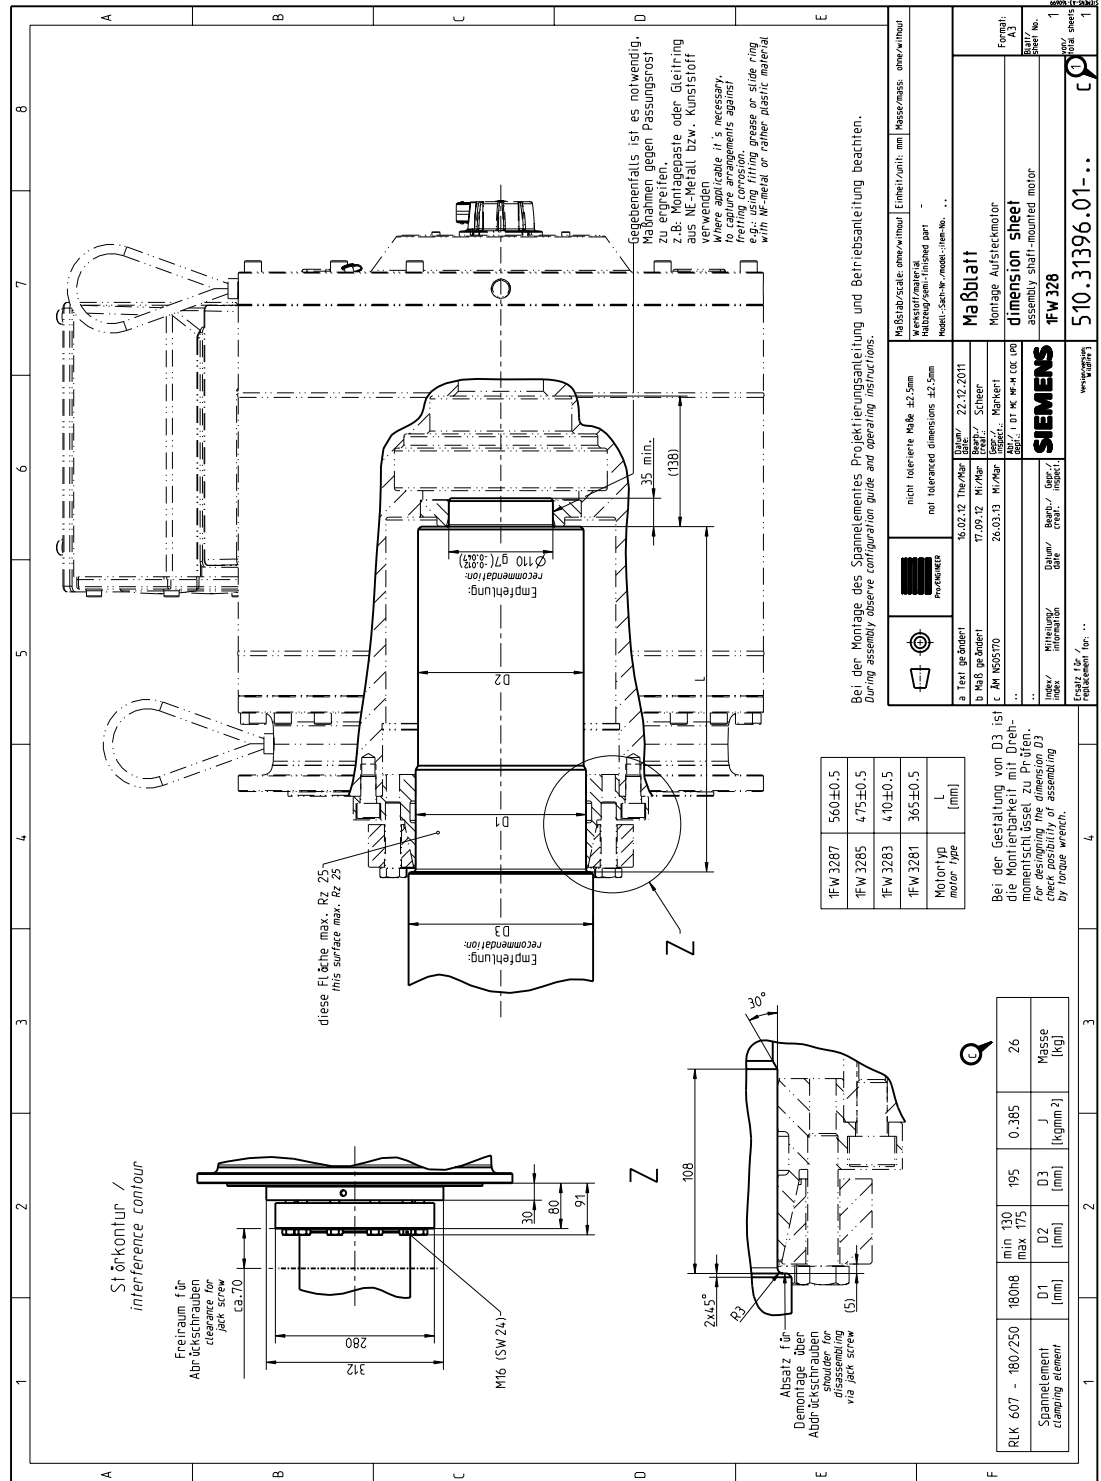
Dimension drawing, mounting plug-on motor 1FW328
